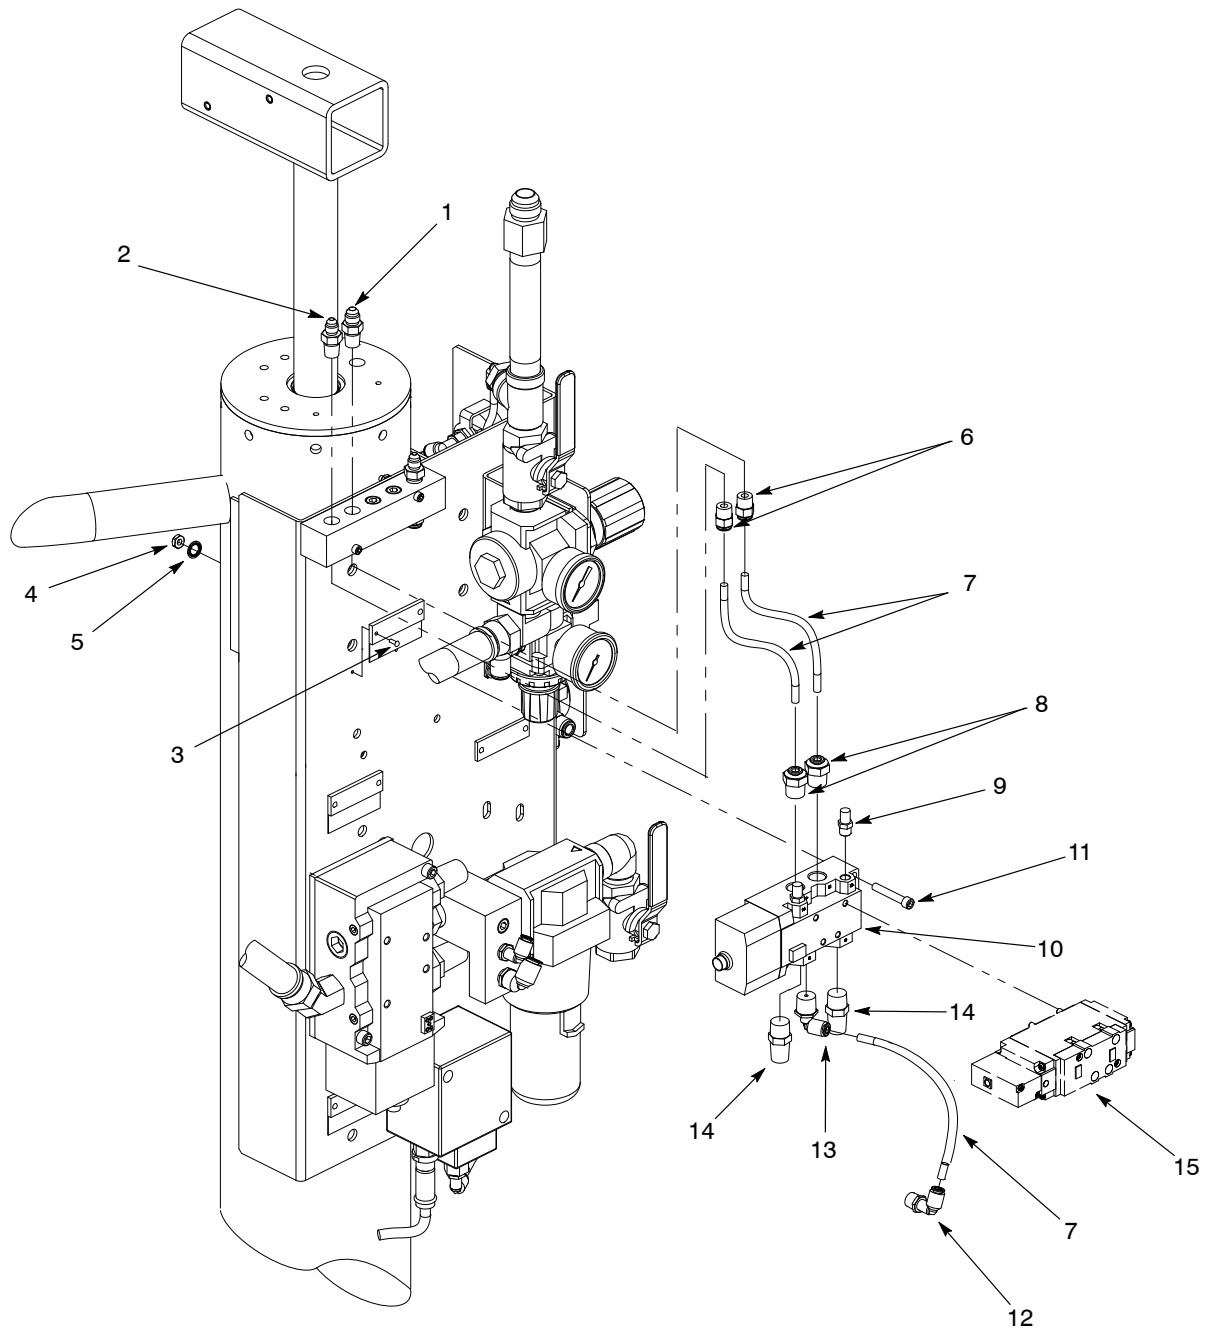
120 Vac ISO 5592/2 Size 1 Valve Base without DeviceNet I/O Cable
